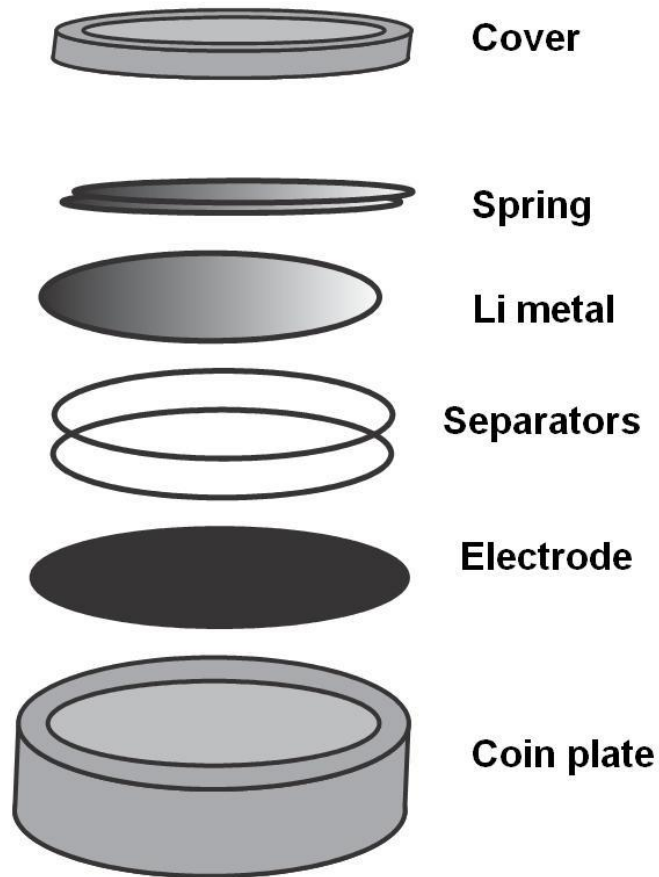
Different components used in the assembly of a Li ion coin cell.
